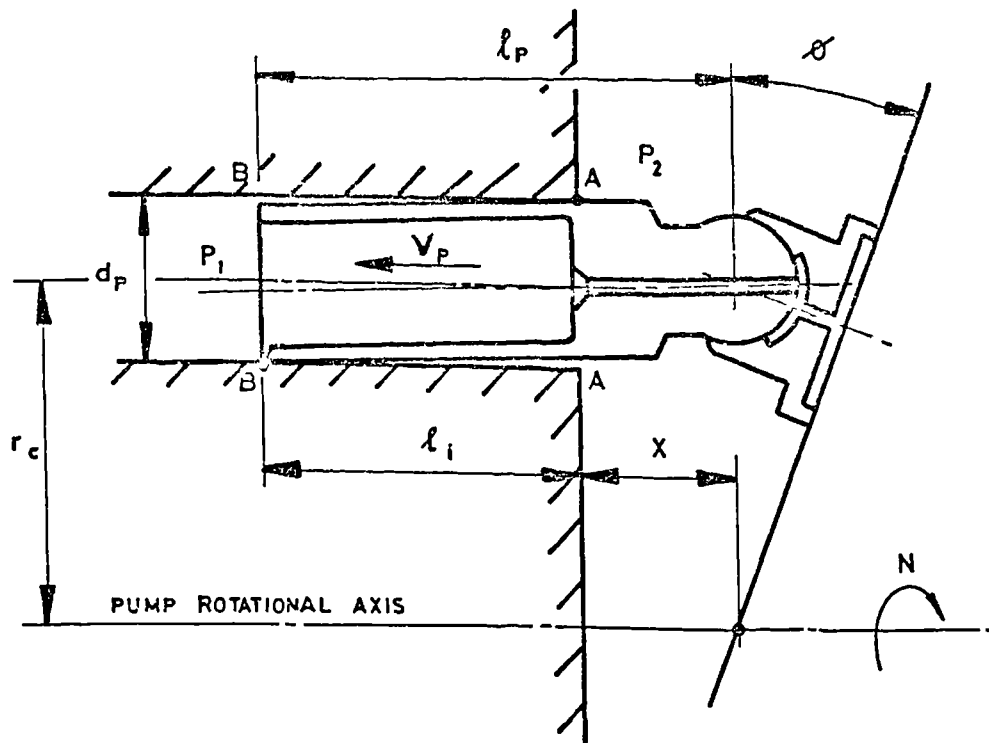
DIAGRAM OF PISTON AND CYLINDER ASSEMBLY
